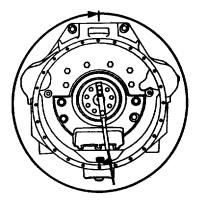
Flywheel Housing Alignment Measurement.
